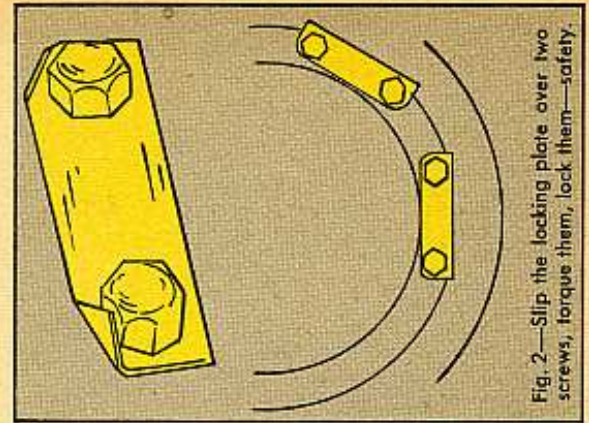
Slip the locking plate over two screws, torque them, lock them—safety.
